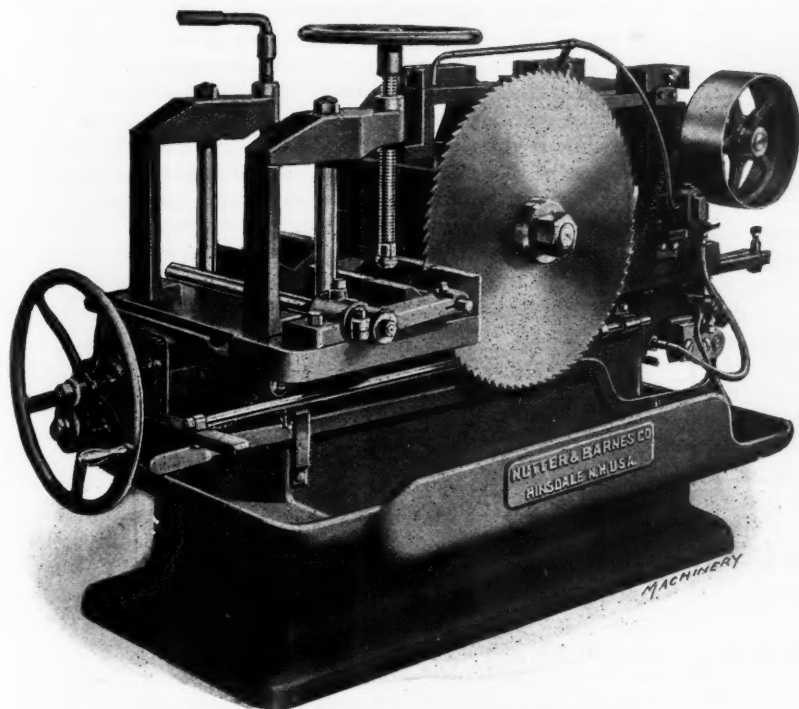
Nutter & Barnes 10-inch Cutting-off Machine
